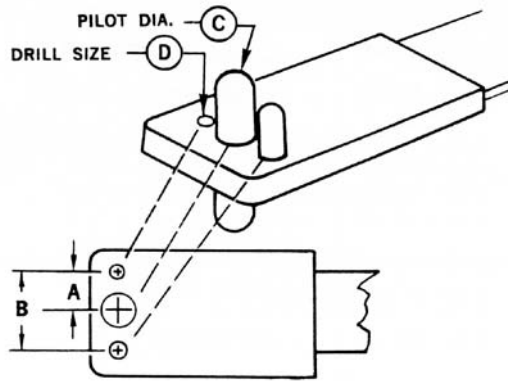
## PLATE NUT DRILL JIGS (FOR ONE LUG TYPE)
